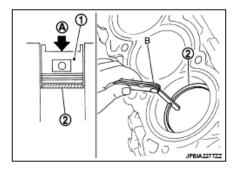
Checking Piston Ring End Gap Courtesy of NISSAN MOTOR CO., U.S.A.
